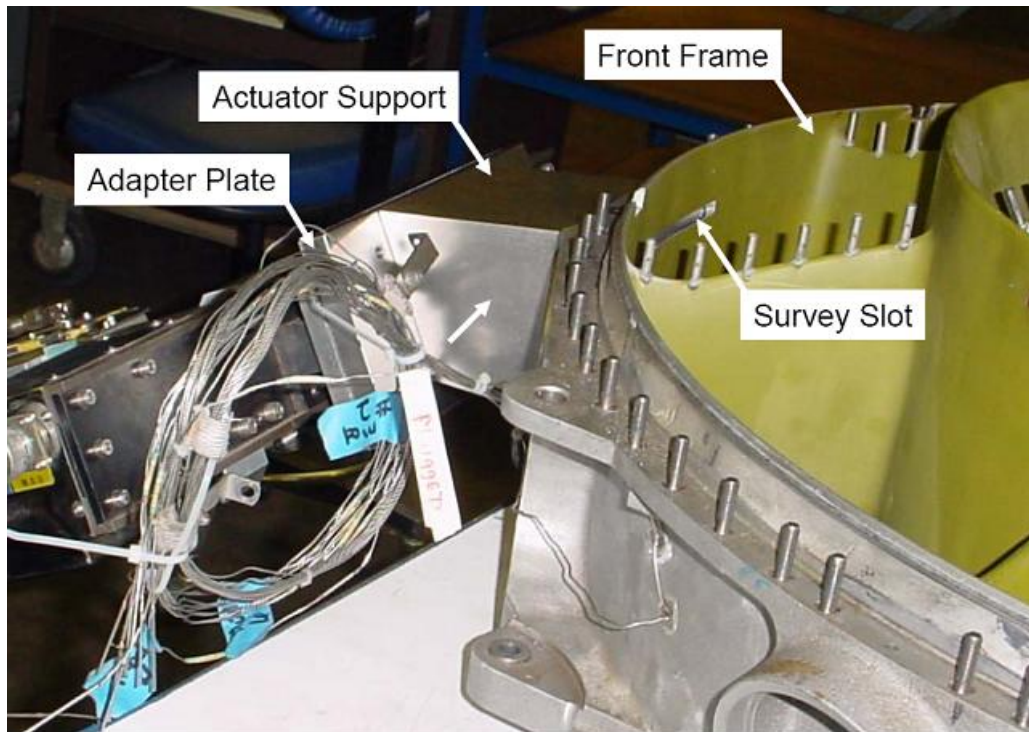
The Rotor Exit Hot Film Survey Bosses Were Installed On The Fan Inlet Housing.
